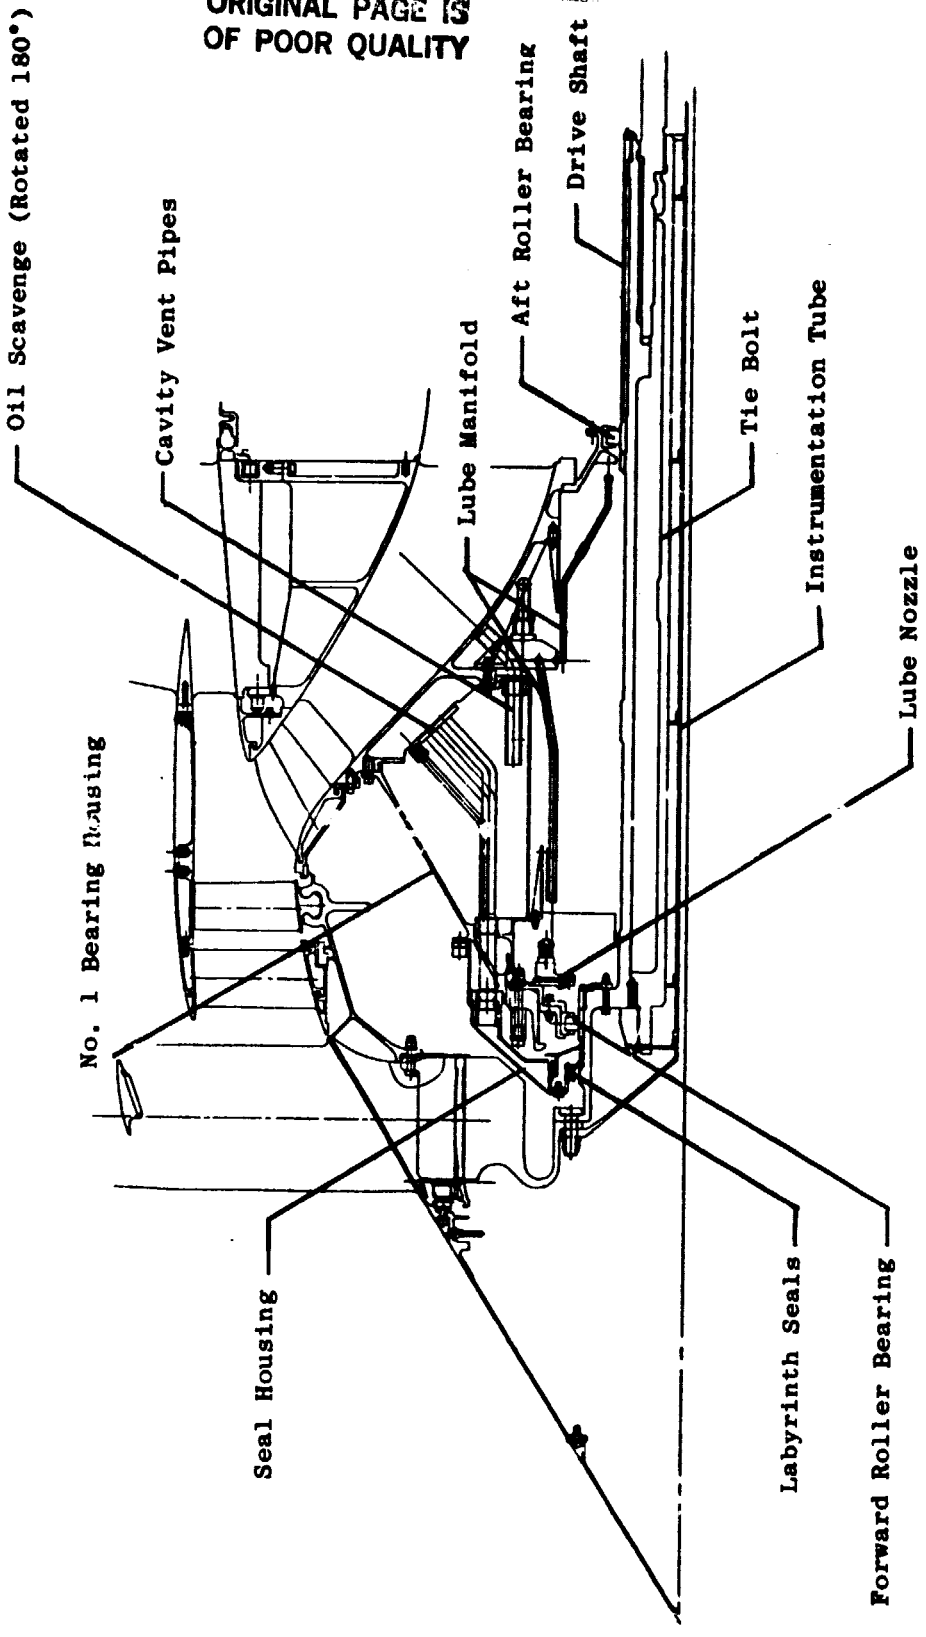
Forward Sump for Full Scale Fan Test.
